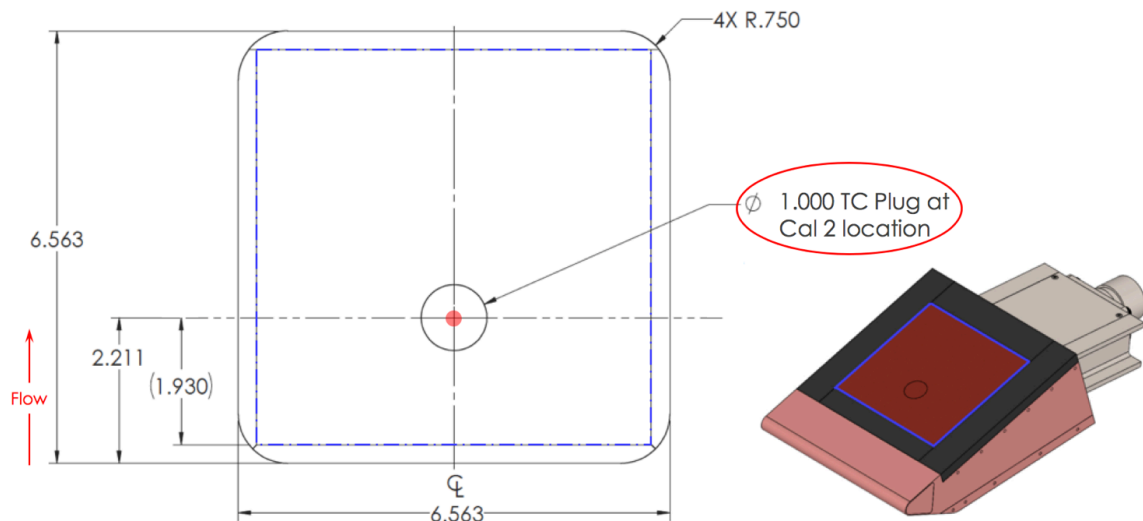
On left, Avcoat plate drawing with dimensions in inches, illustrating location of the in-depth TC plug. On right, assembly drawing of Avcoat plate mounted onto a water-cooled wedge holder.
